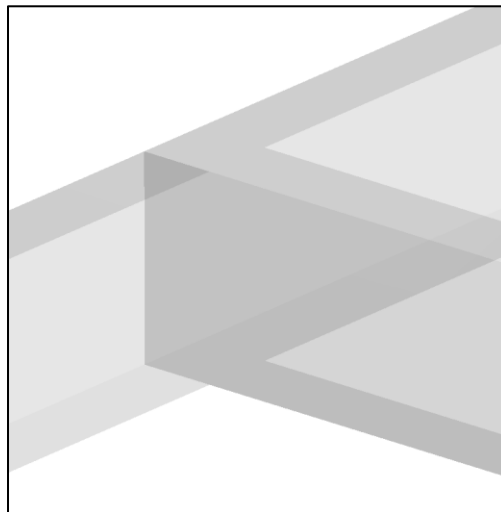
SURFACE PARTS WITH CO-PLANAR EDGES
